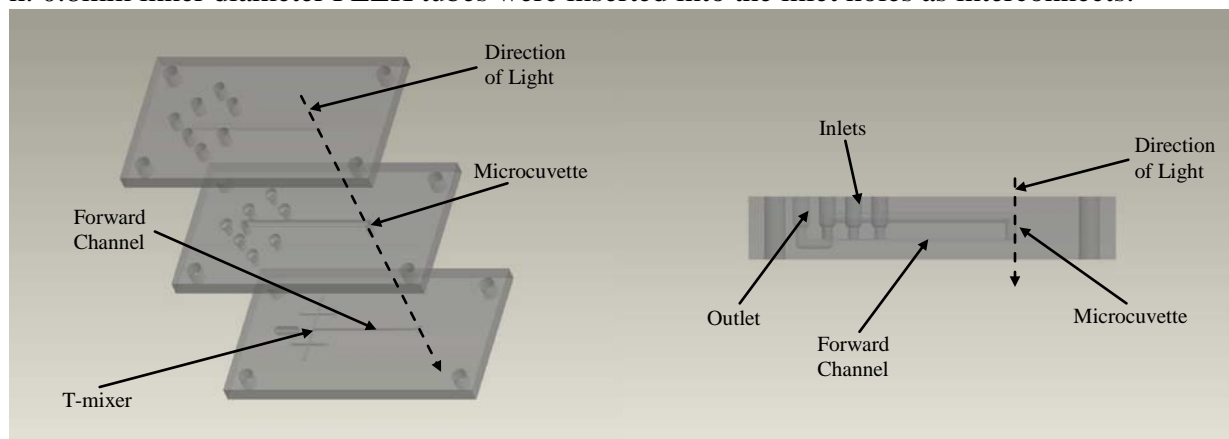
(Left) Exploded view of the microfluidic lab-on-a-chip. (Right) Side view of fully assembled LOC showing the micro-cuvette.
